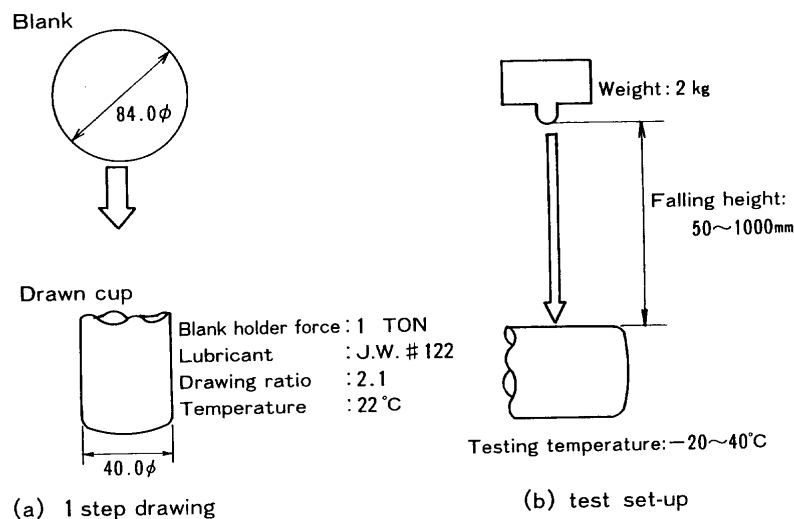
Testing method for evaluation of embrittlement after press forming.
